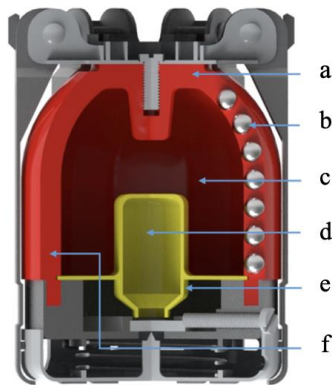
Cross-section of bomb body with description of construction elements: a – bomb body; b – steel ball; c – blasting material; d – detonating charge; e – cardboard insert; f – filling material
